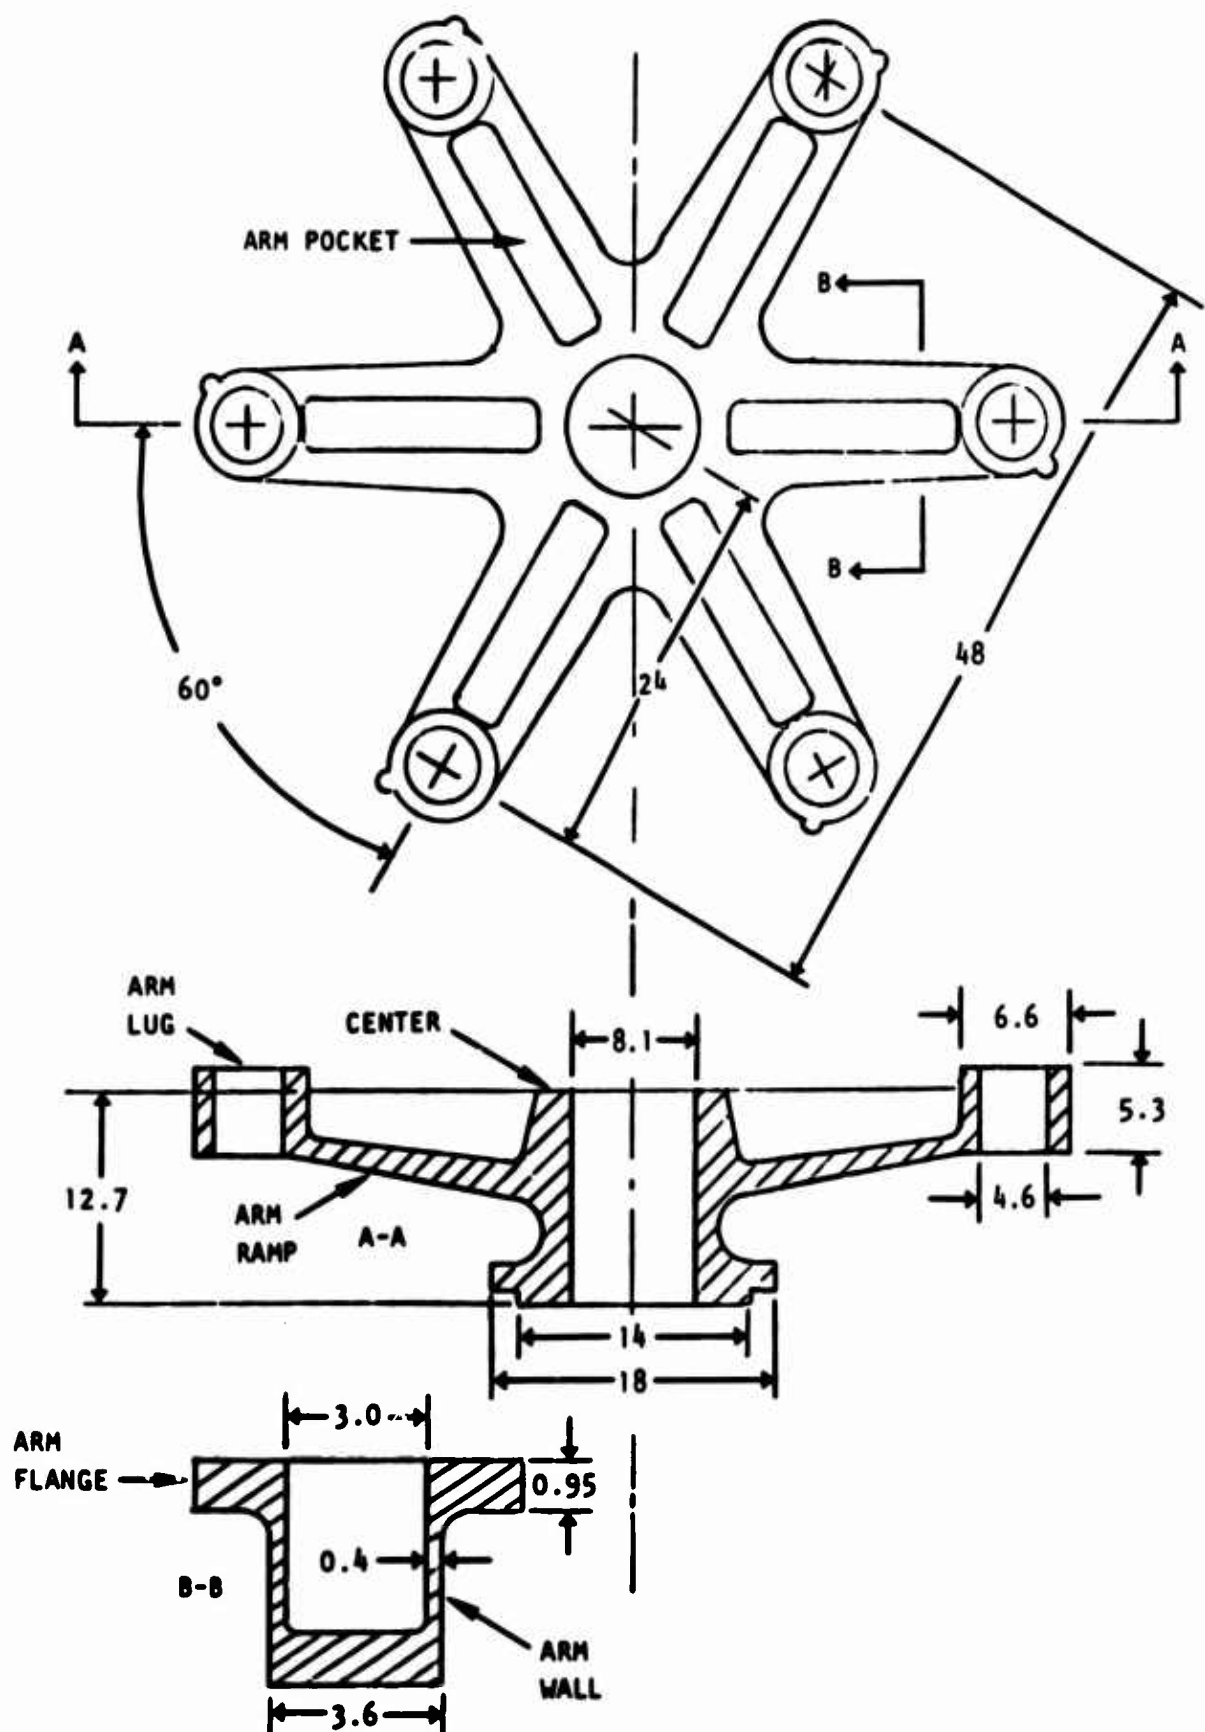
Rotor Hub Dimensions and Section Nomenclature
